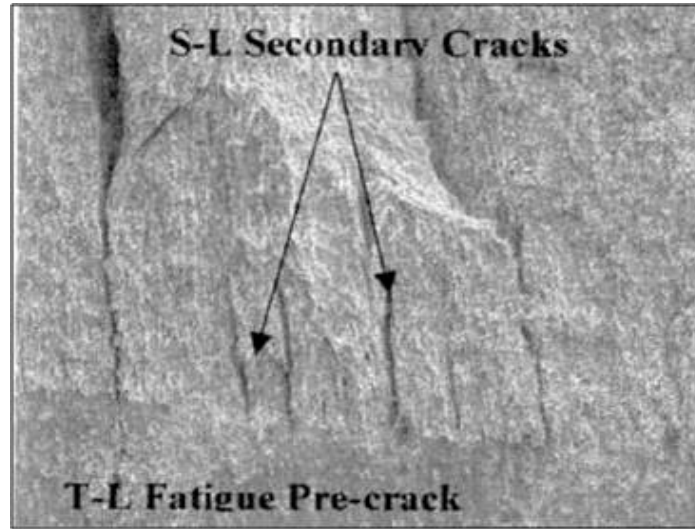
Secondary Cracks in SCC fracture surface for AA5083. (From Bovard,[20])
